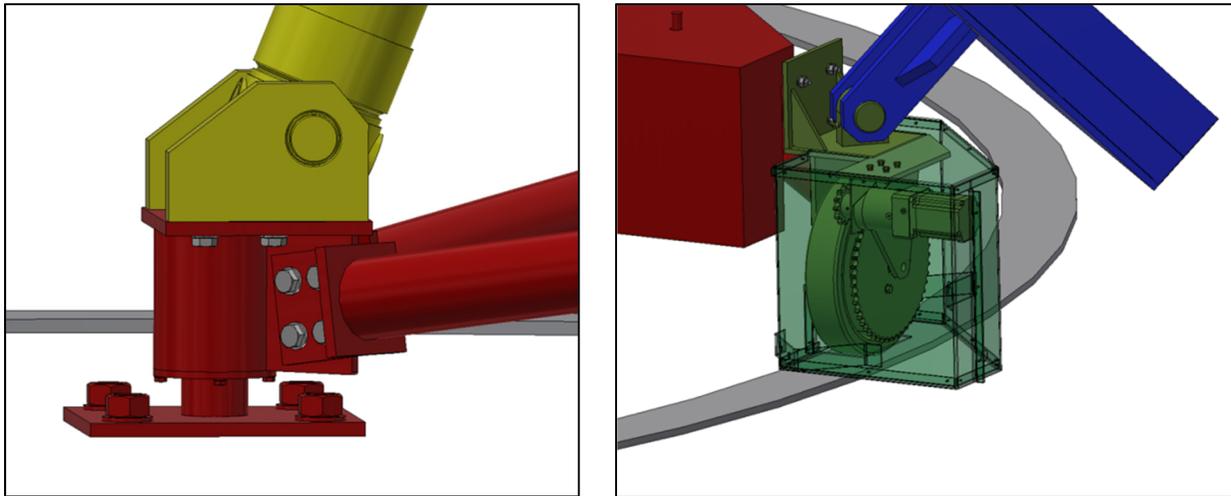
Central bearing (left) and encased and weighted driven wheel with chain reduction gear (right)
